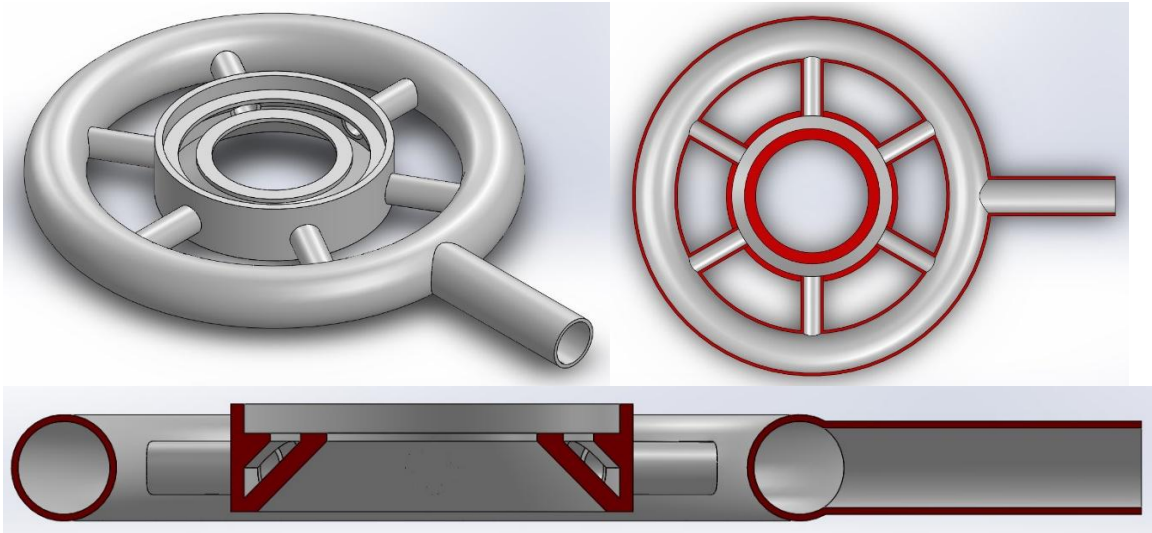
Bottom manifold design (top–left: trimetric view; top–right: top cross–section view; bottom: side cross-section view)
